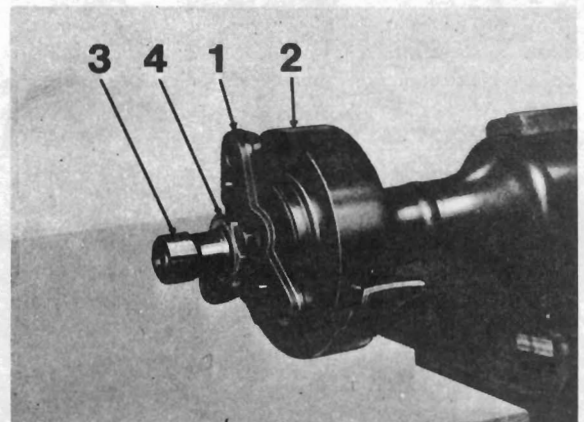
Propeller shaft centre bearing support (Sec 3)
